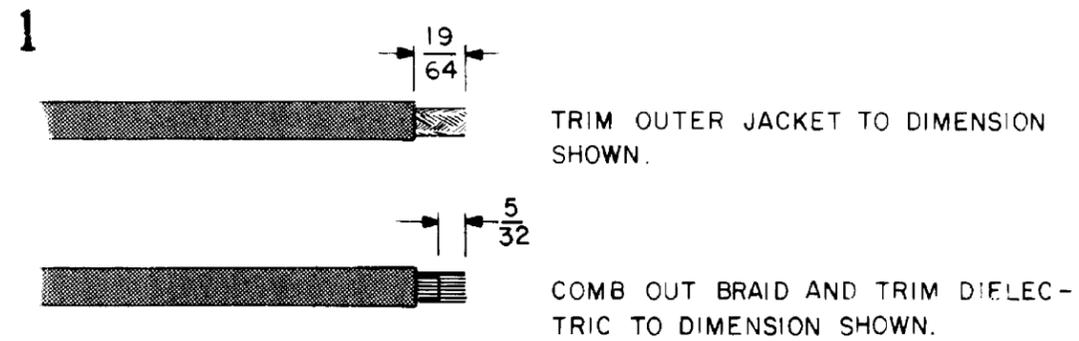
030-00005-0000 CONNECTOR ASSEMBLY
